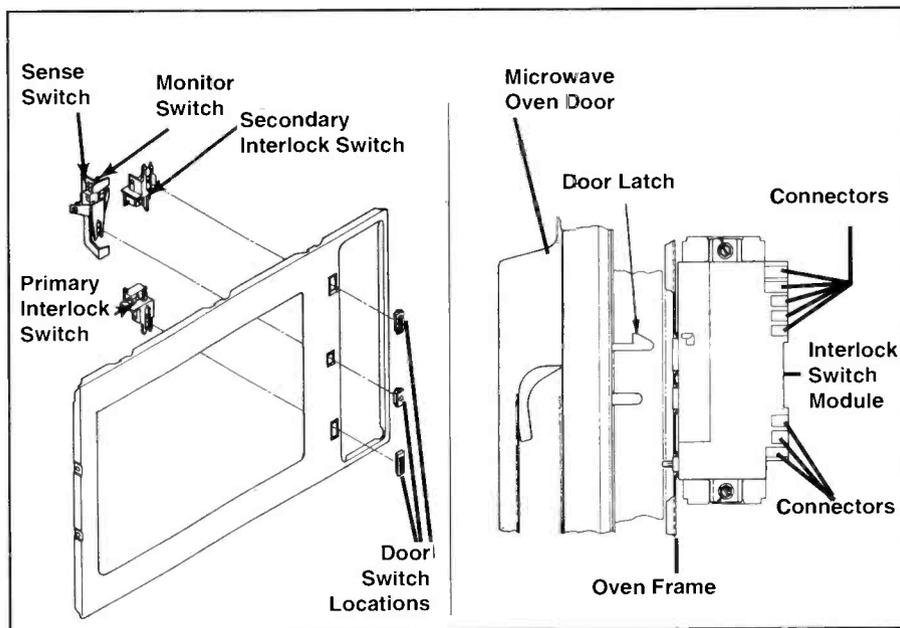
Drawing A shows the door switch assembly. B shows the interlock switch module.
